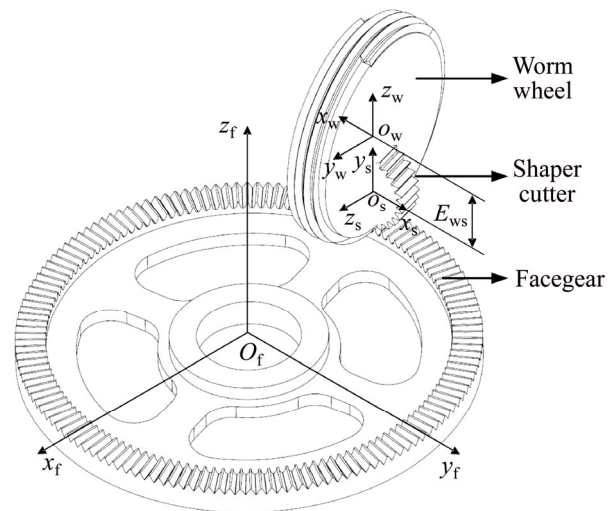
Meshing principle of face gear, shaper cutter and worm wheel
